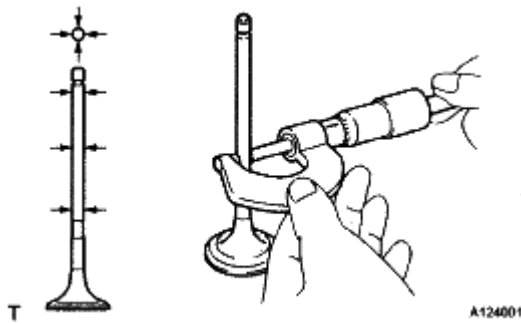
Checking Diameter Of Exhaust Valve Stem
